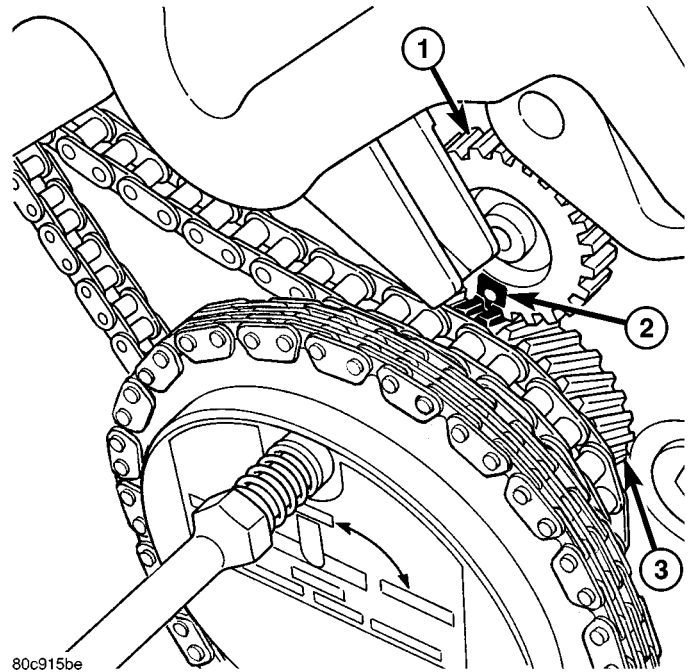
COUNTERBALANCE SHAFT ALIGNMENT MARKS
